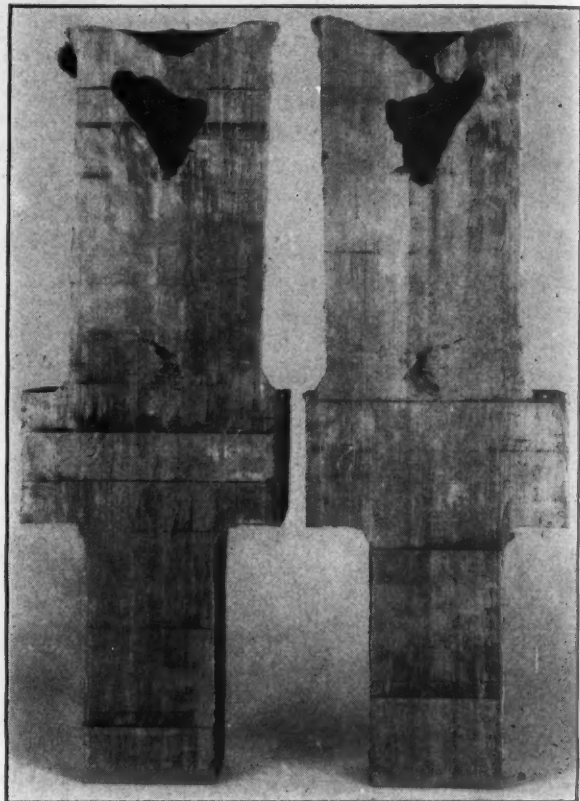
Test casting of nickel-copper alloy (monel metal);  $1\frac{1}{2}$  lb. exothermic material in riser. Casting is sound, although secondary shrinkage is shown at base of riser.
